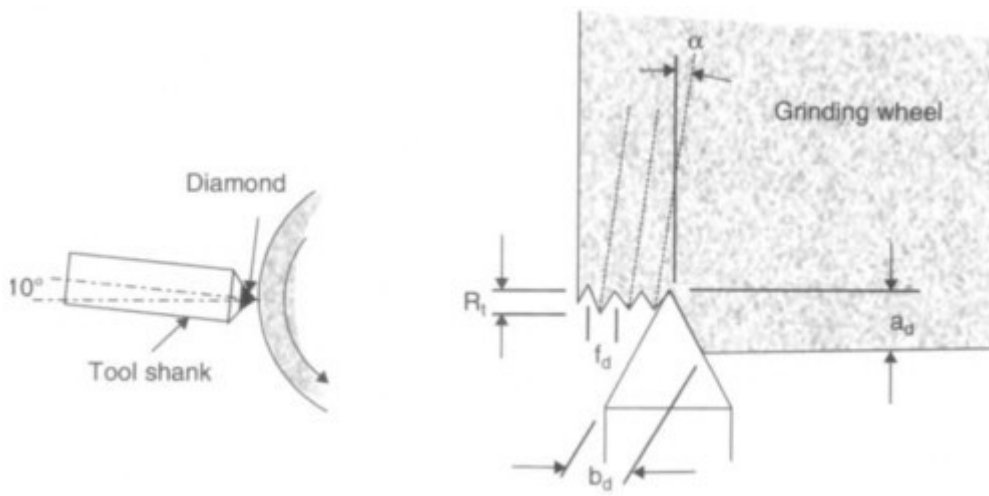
Single-point dressing with a stationary non-rotating dressing tool [169]
